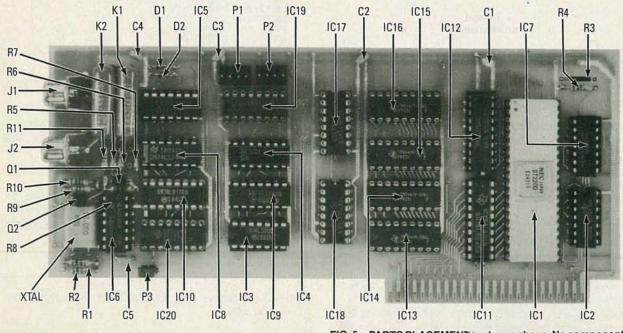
PARTS PLACEMENT is shown above. No components are mounted on reverse side of board.
